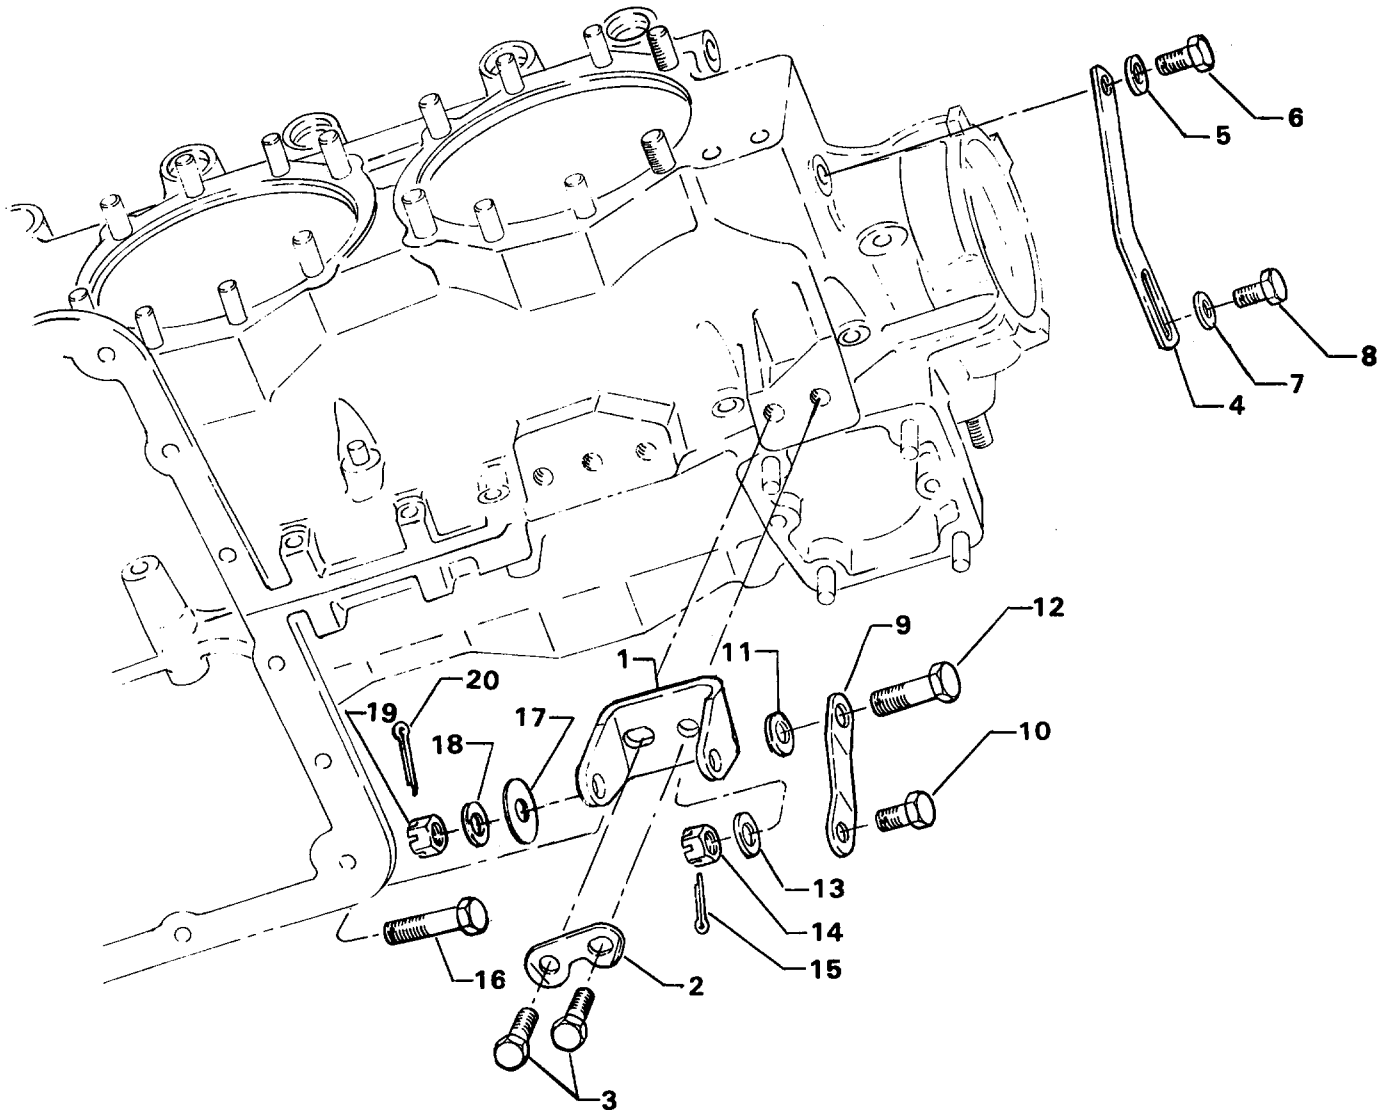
STARTER MOTOR AND ATTACHING PARTS
